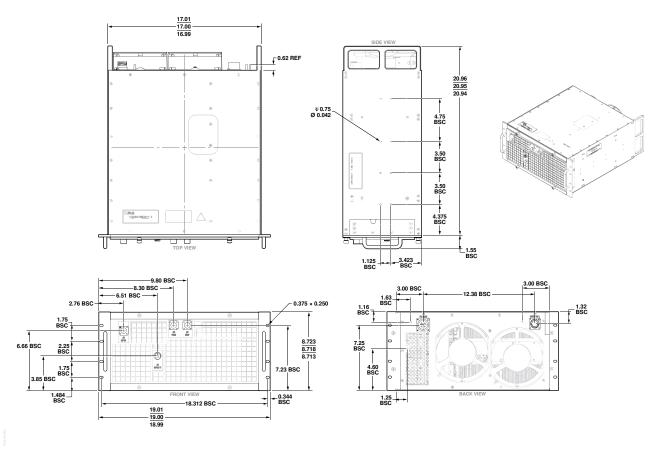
6-Connectorized Module [MODULE] (ML-6-2) Dimensions shown in inches
